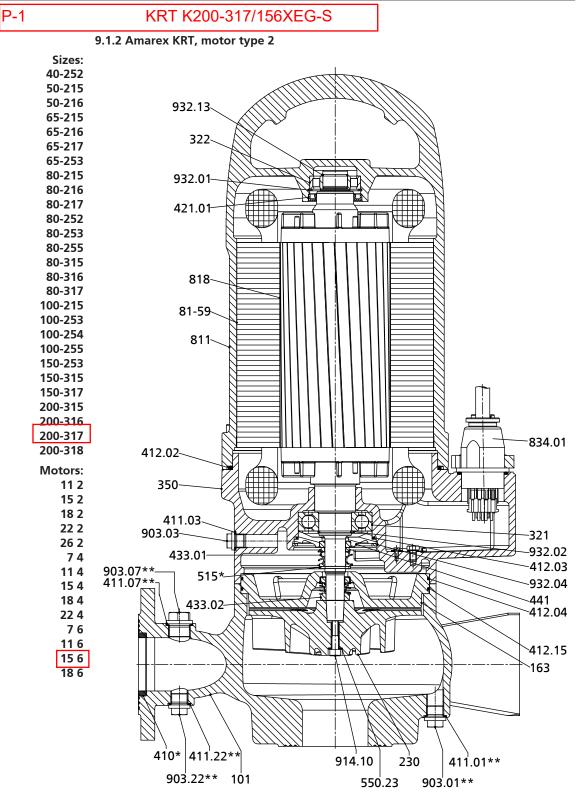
General assembly drawing Amarex KRT, motor type 2
